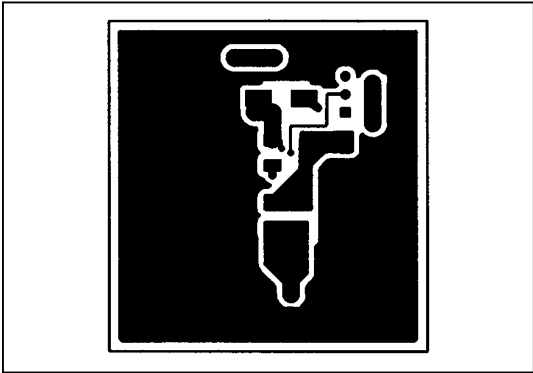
MAX778 EV Kit PC Layout (Solder Side)
